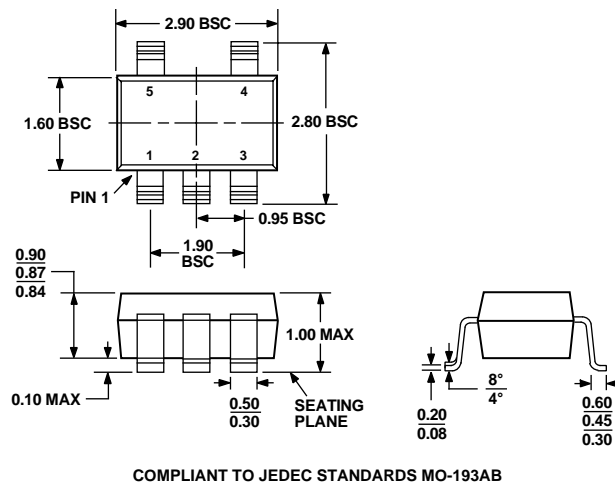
5-Lead Thin Small Outline Transistor Package [TSOT] (UJ-5)
